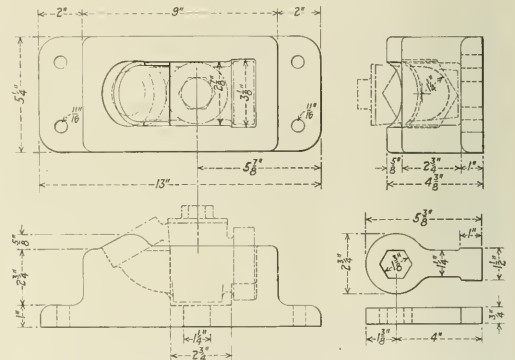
Block for Holding Angle Cock When Removing and Applying Cap, Also Cap Wrench
